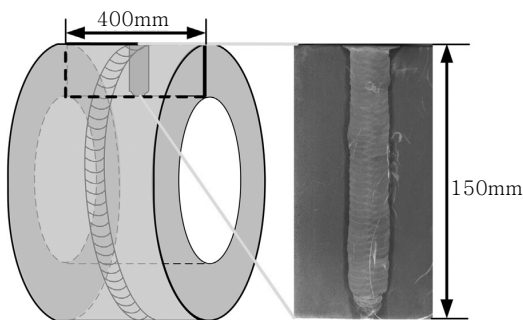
Welded pipe and fusion zone profile³⁸⁾
